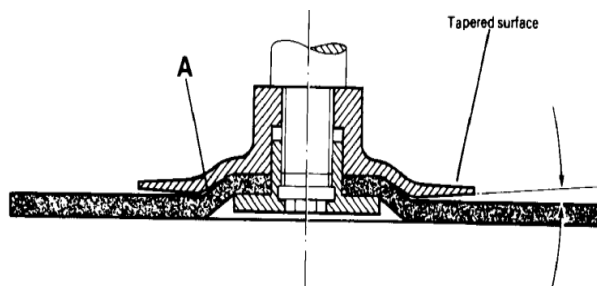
FLANGE ASSEMBLY FOR A DEPRESSED-CENTRE WHEEL
